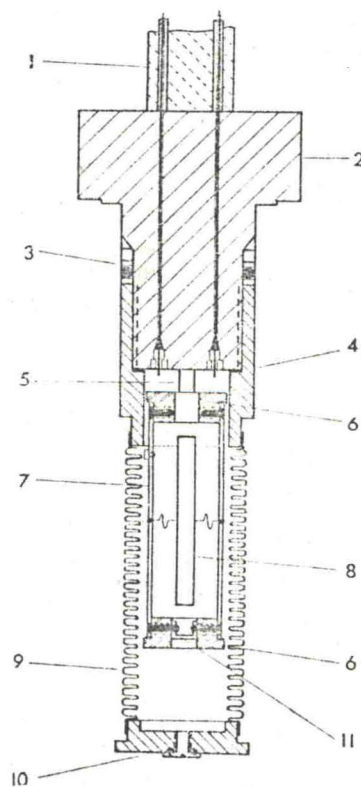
Details of mounting of crystal and attachment to pressure vessel closure. 1, Tufnol cylinders; 2, pressure vessel closure; 3, pressure seal; 4, stainless steel sleeve; 5, spacer; 6, pyrophilite ring; 7, metal support strap; 8, quartz crystal; 9, stainless steel bellows; 10, bottom plug; 11, connector.
